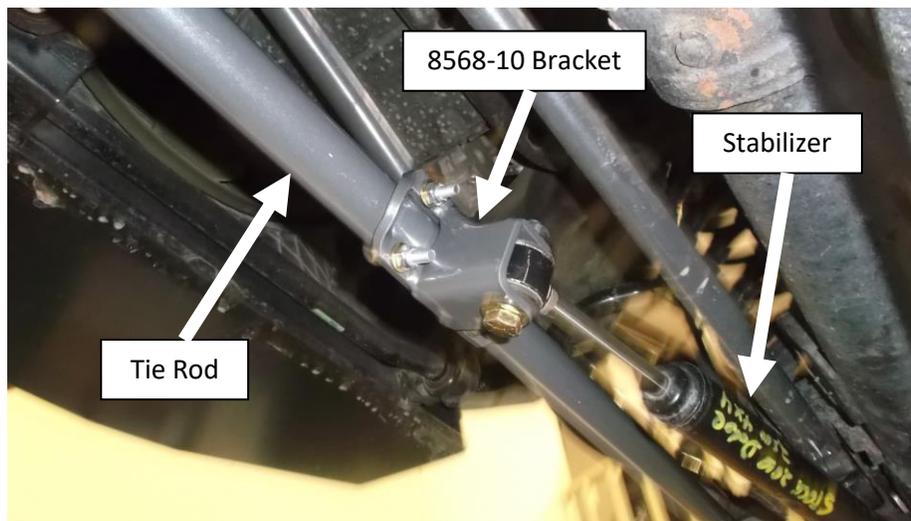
Steering Stabilizer Shown Mounted to 8568-10 Bracket
